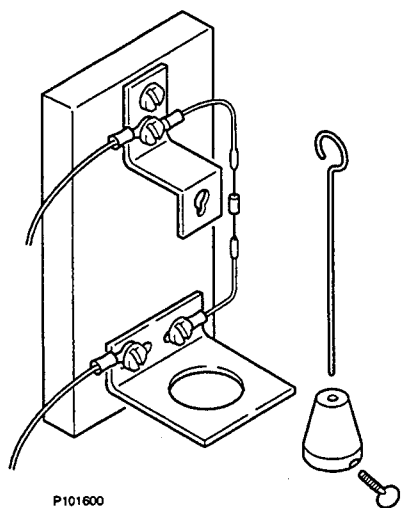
PLUMB BOB TILT ASSEMBLY
